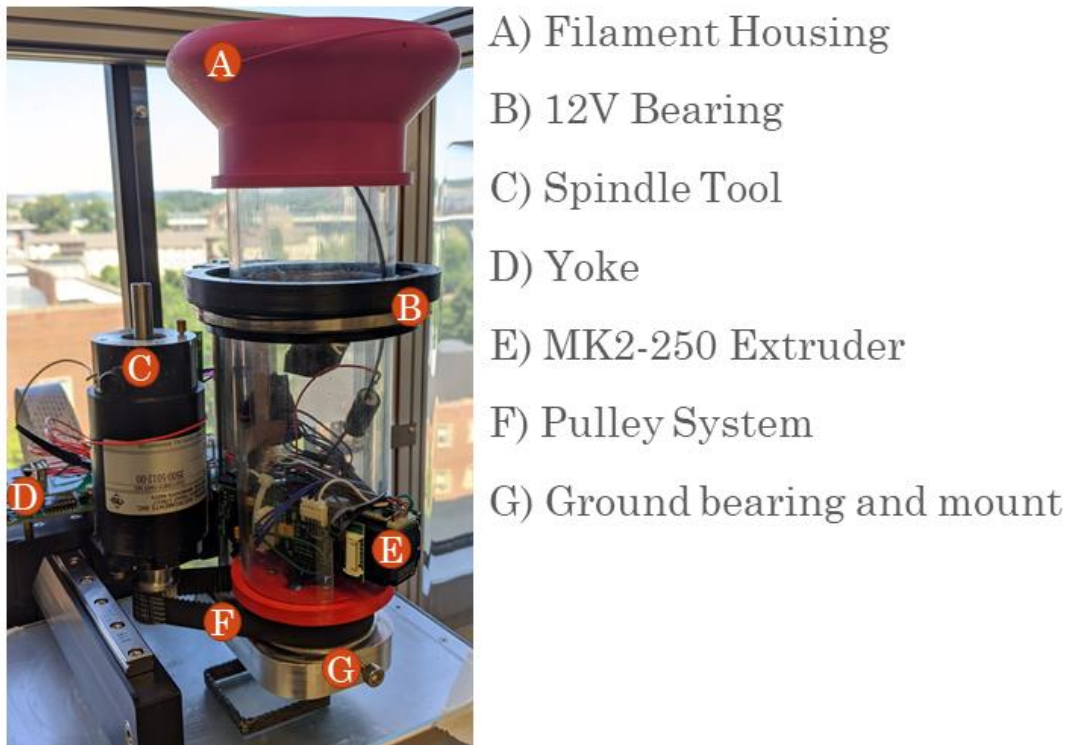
Installed RFFF extruder with DC motor in a Hyrel printer
